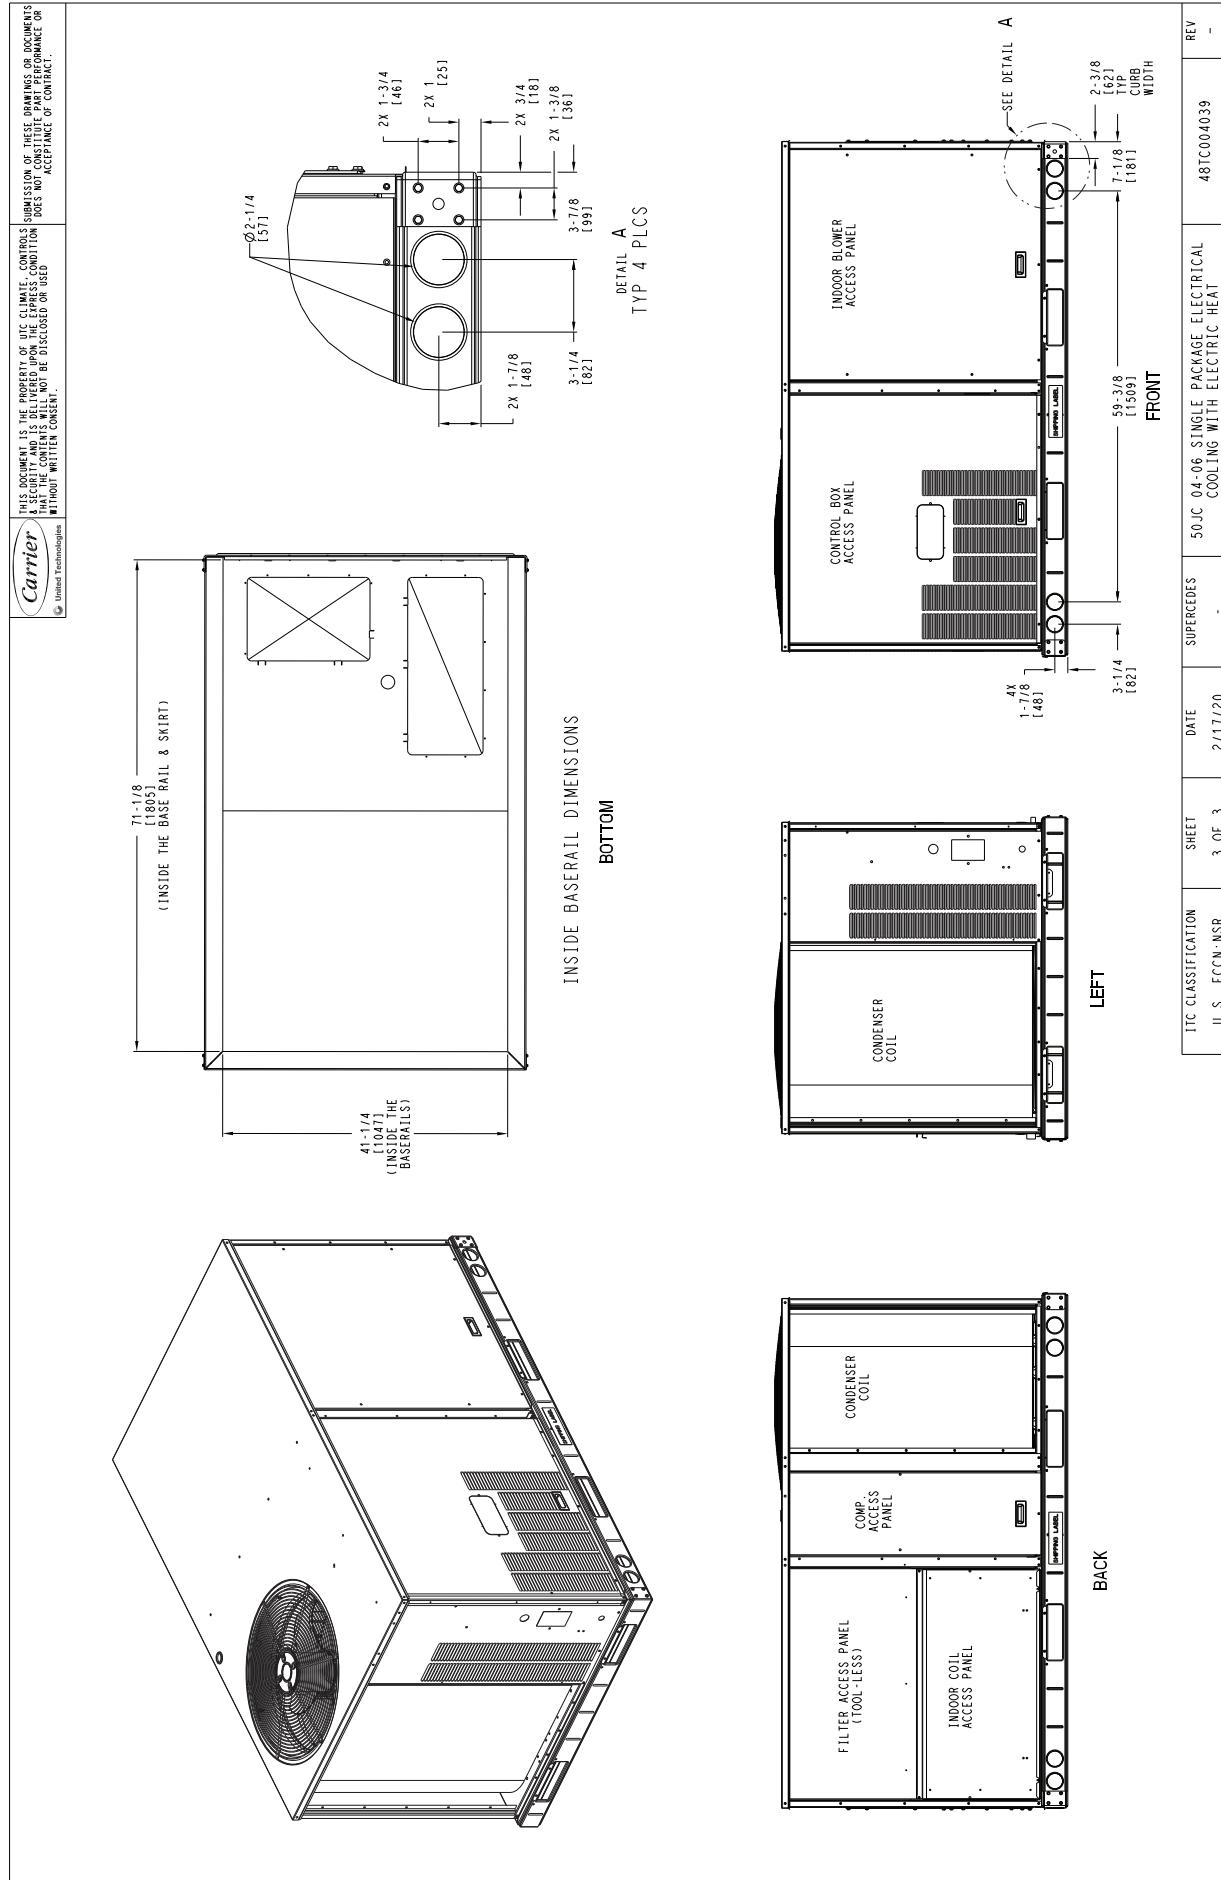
50JC04-06 Base Unit Dimensions (cont)
